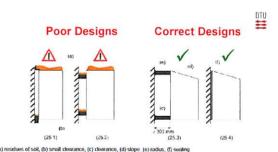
quipment fixed to walls. {25.1, 25.2} Horizontal surfaces or ledges retain soil and small clearances rapede cleaning between walls and equipment; {25.3} horizontal supports of equipment (see also Figure 23) must be radiused and properly fixed to the wall allowing sufficient clearance; {25.4} equipment can also be directly fixed to the wall if sealing materials are used.
